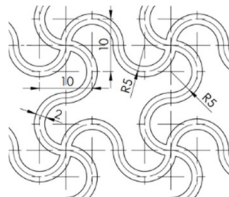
2D view of one cell of the metamaterial with geometrical dimensions
